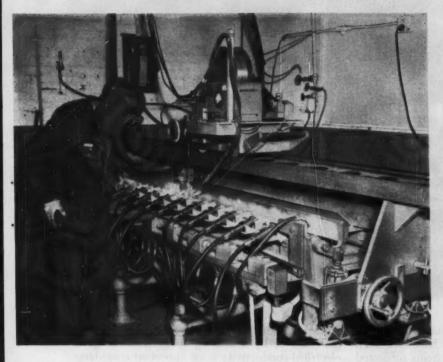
(Left) Special machine for the shielded-arc seam welding of door panels. A single welding head lays down one bead, after which it advances to the next joint where a second weld bead is deposited.
